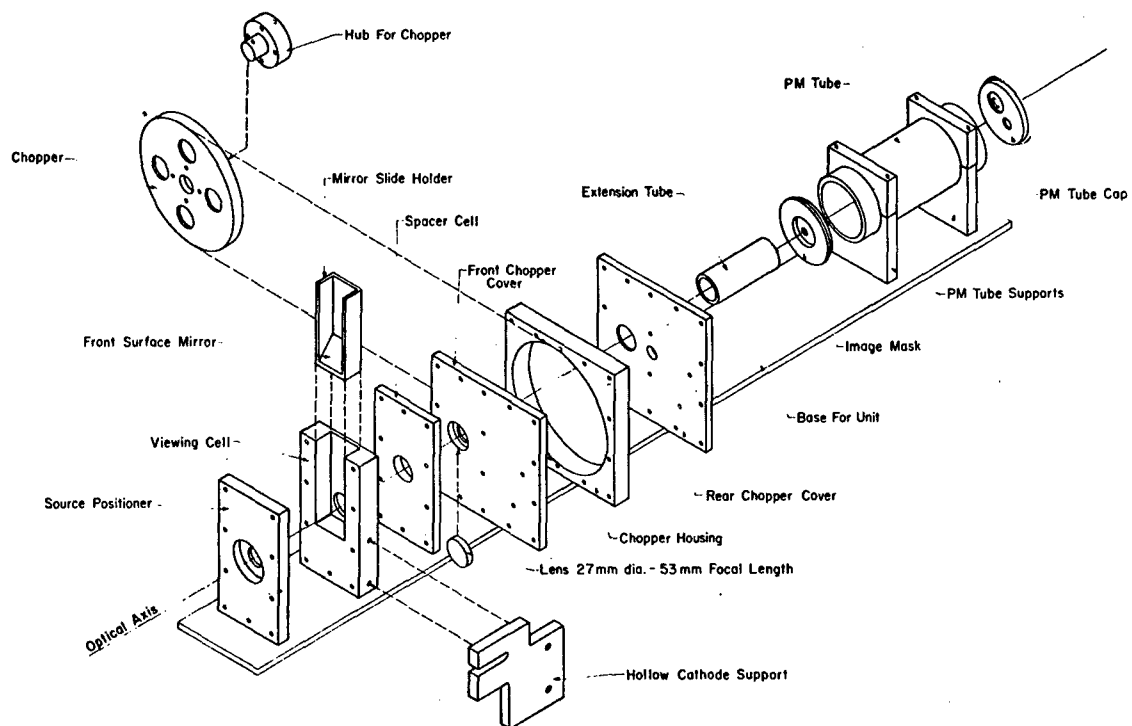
EXPLODED VIEW OF OPTICAL BLOCK AND PM TUBE
